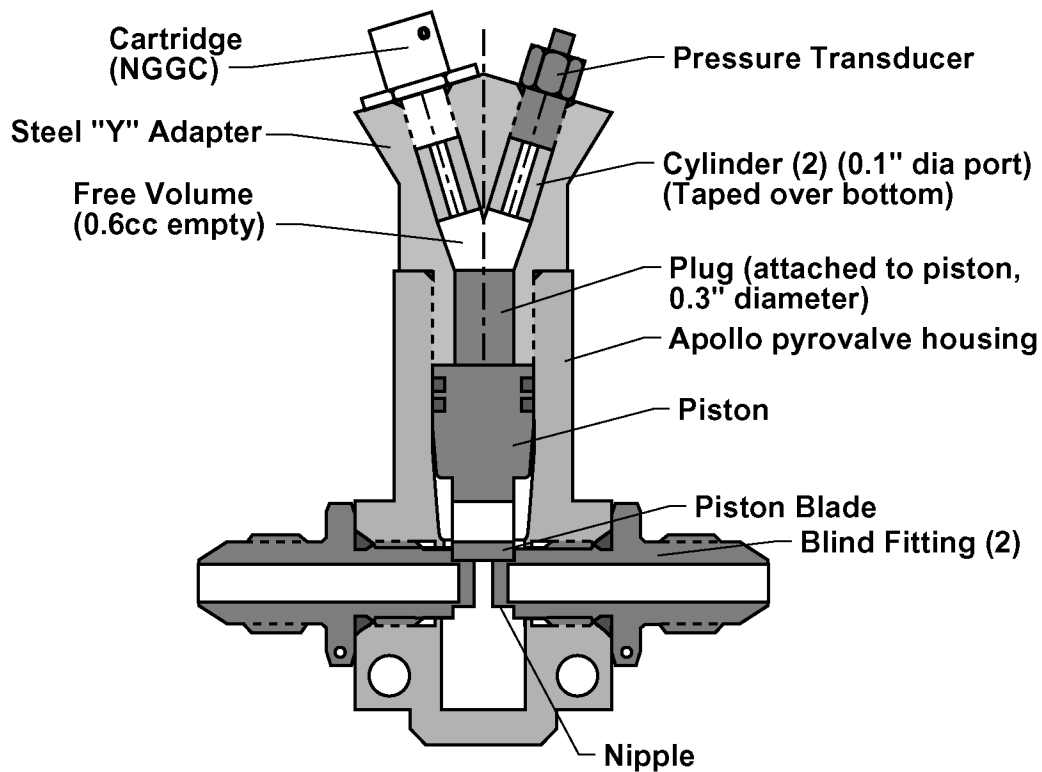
Cross sectional view of Apollo pyrovalve modified to accept two initiators. The pressure transducer was installed in the second port to measure activation pressure.
